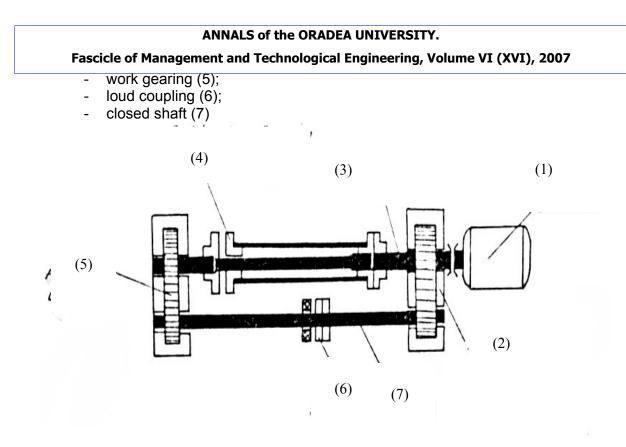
Testing stand with gears type FZG, with closed circuit of load force
